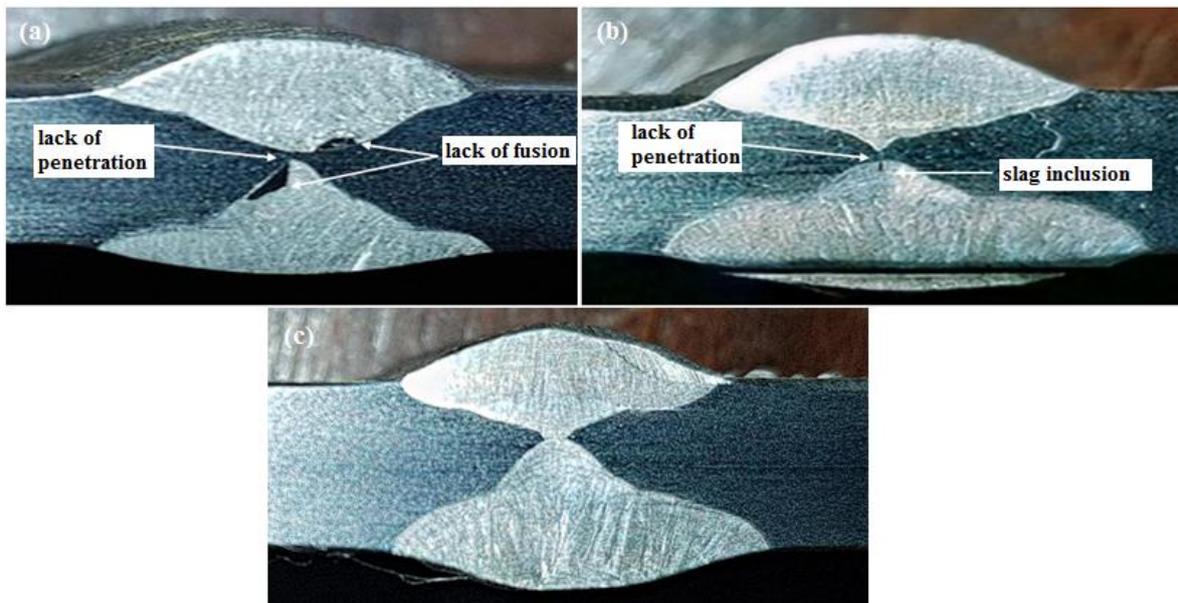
Macrography of the welded joints for heat inputs: 1.105 kJ/mm (a), 1.346 kJ/mm (b) and 1.55 kJ/mm (c).
